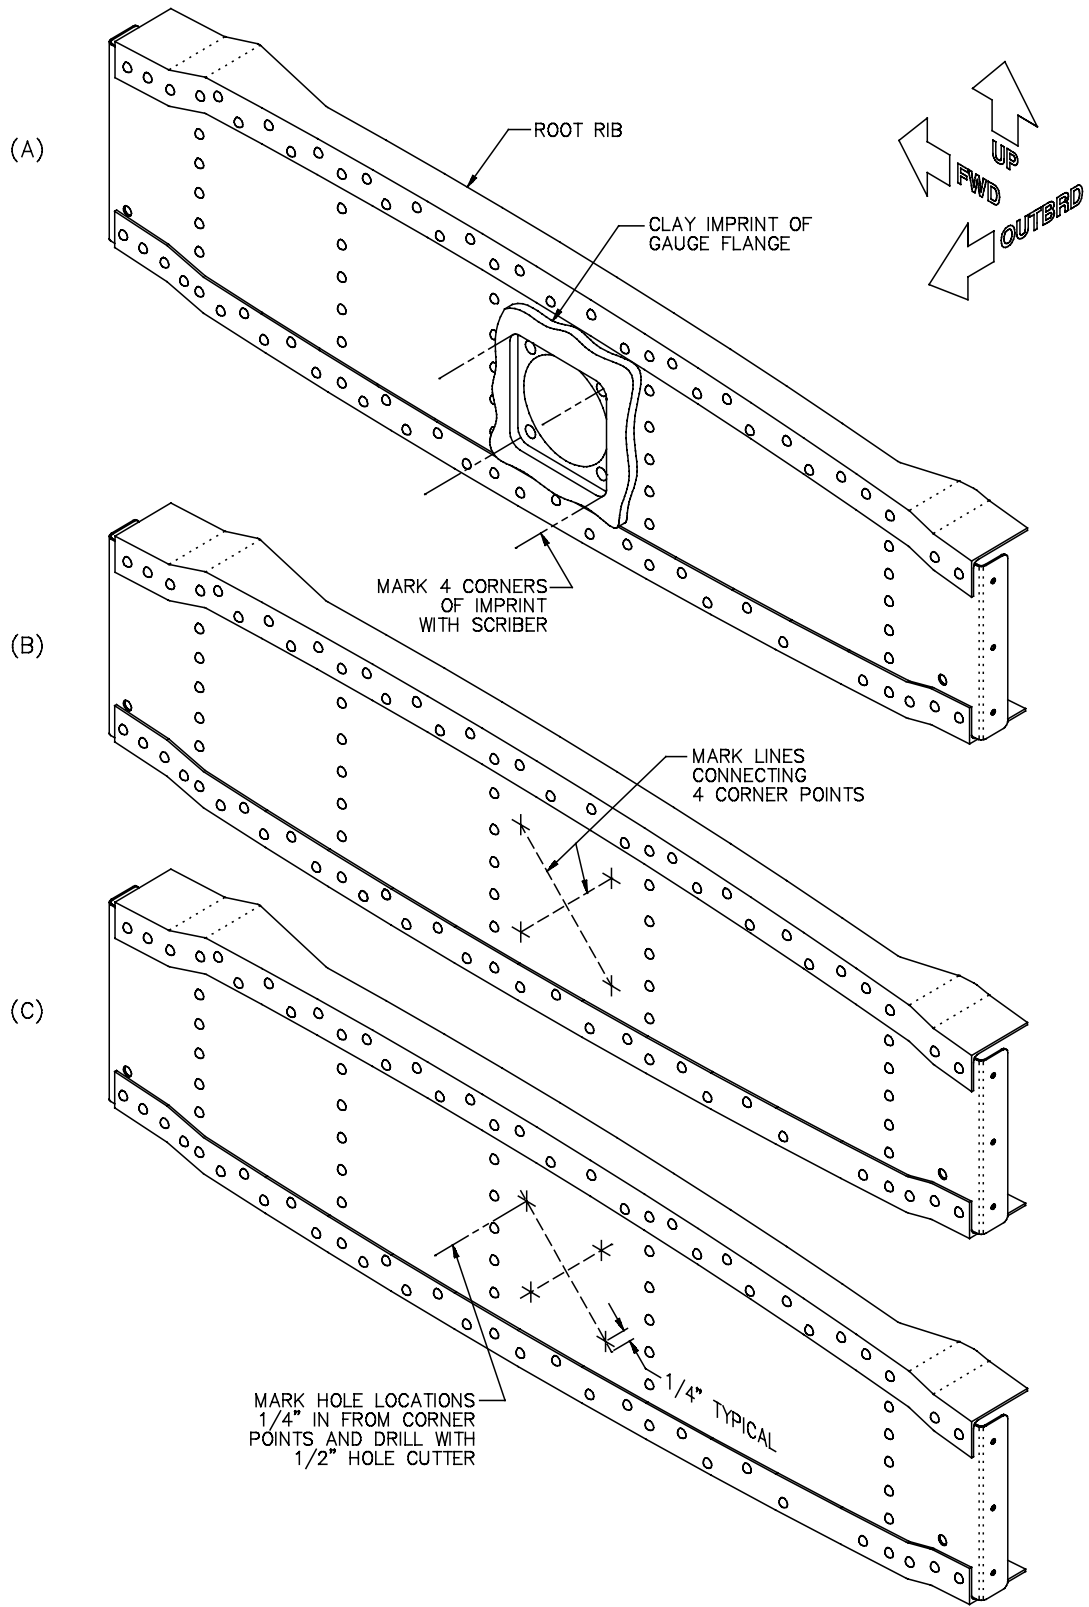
Marking and Drilling the Corner Holes for the Fuel Gauge Mounting Flange Cutout
